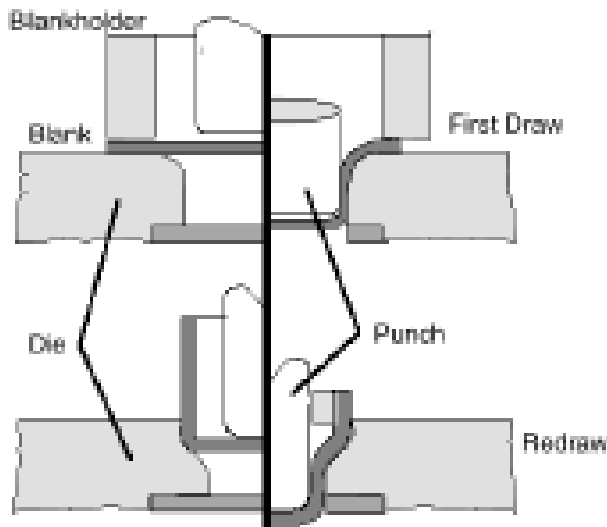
Direct Deep-Drawing of seamless tubes from circular blanks. Top picture: First drawing of a blank. Bottom picture: Redrawing of the cup into a taller one with a smaller diameter. On the left is displayed the configuration before drawing, while that on the right is during the operation.
